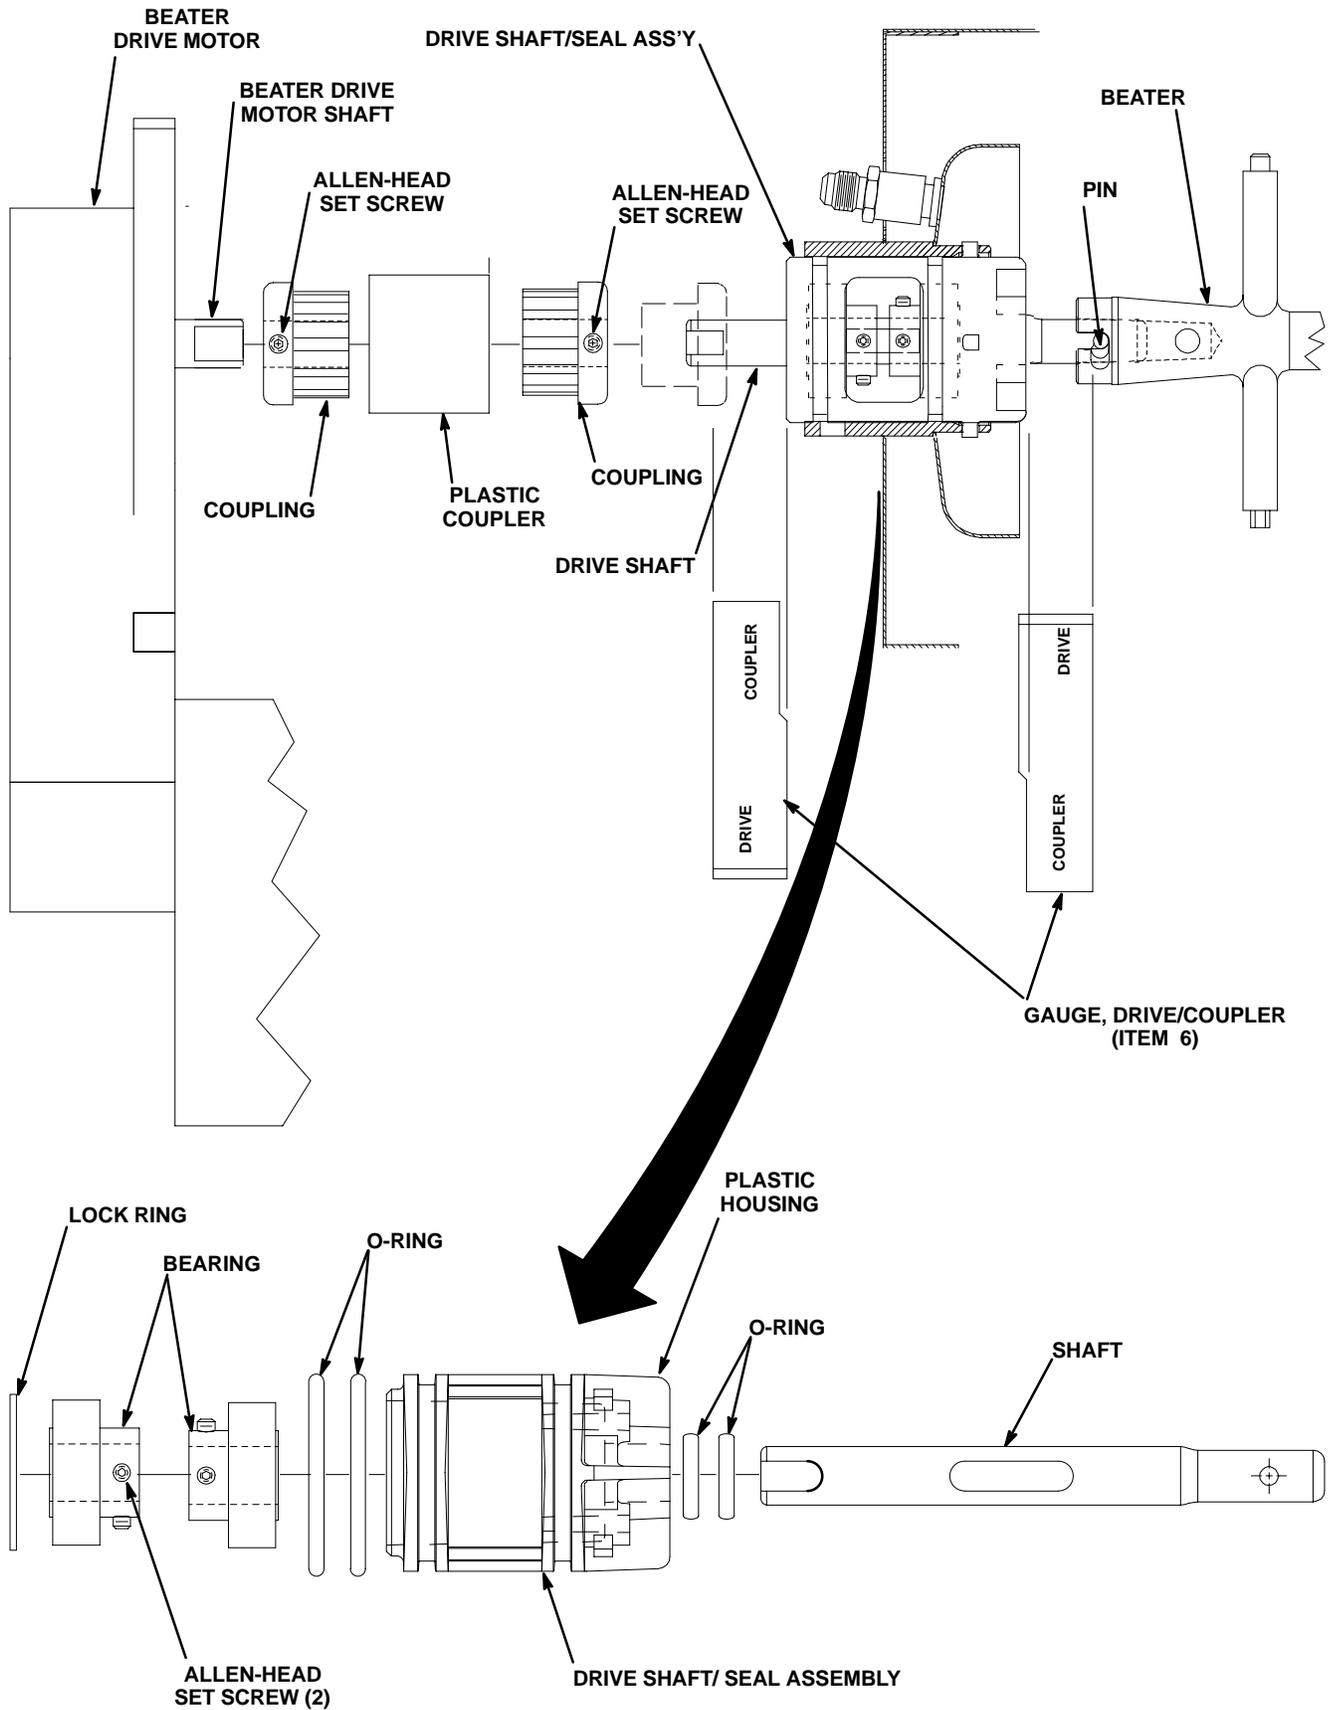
SERVICING BEATER MOTOR DRIVE SHAFT/SEAL ASSEMBLY
